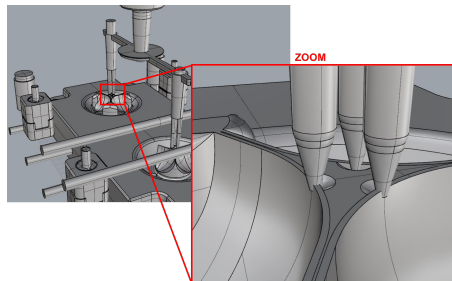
3D cad of the internal view of the injection moulding. The injection points are zoomed
